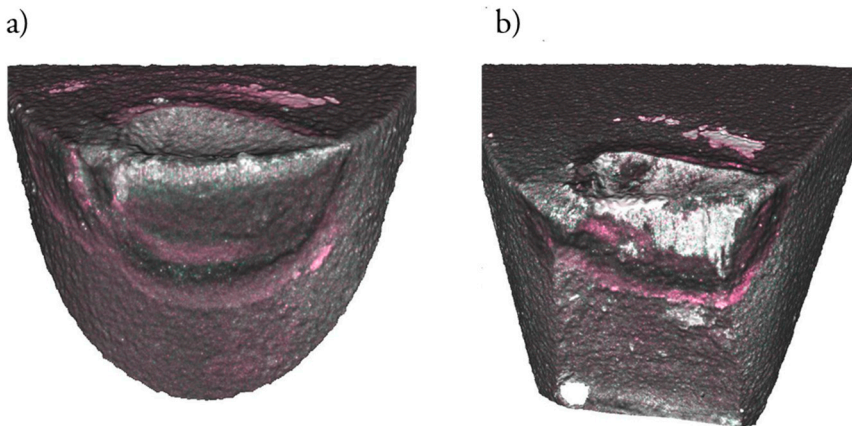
Worn Cubic Boron Nitride (pcBN) tool after machining stainless steel 316L taken using Alicona Infinite Focus 3D microscopy. a) Predictable wear b) unpredictable tool failure.
